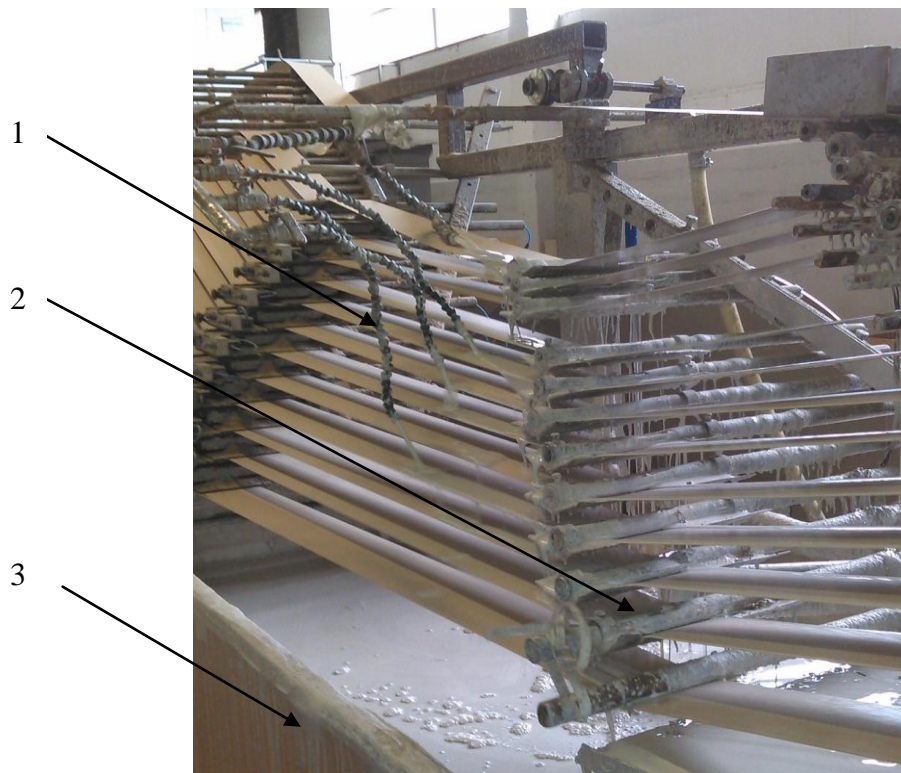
Cardboard roll 1 onto revolver winder 2
